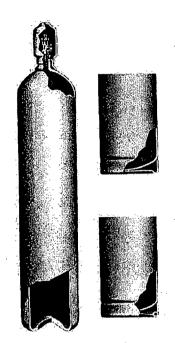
Chlorine Cylinder (Left - bump-bottom; Upper right - double-bottom; Lower right - foot-ring)
